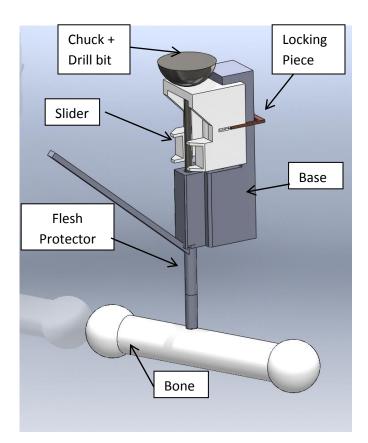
Solidworks of v4.0 of the hydraulic slider. The figure contains the drill bit and chuck, base, slider, bone, flesh protector and locking piece.
